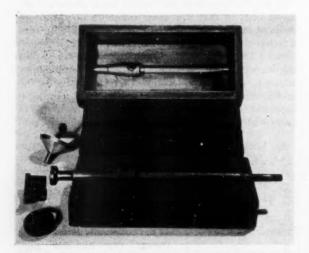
Corebox and cores used for making the hot tear casting mold. The torn casting, with the sprue removed, is shown resting in the drag half of the mold. The sand mold is completed by the chill plug and end core at one end and the stud at the other end as shown in the photo.
